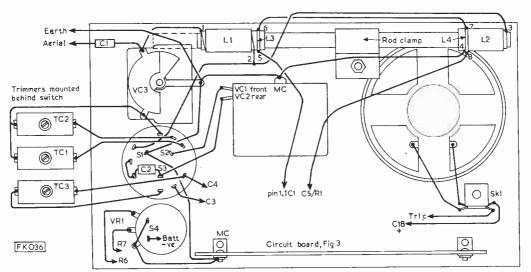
Front panel component location and interwiring. Capacitors C3 and C4 are mounted between the board and the front panel.
